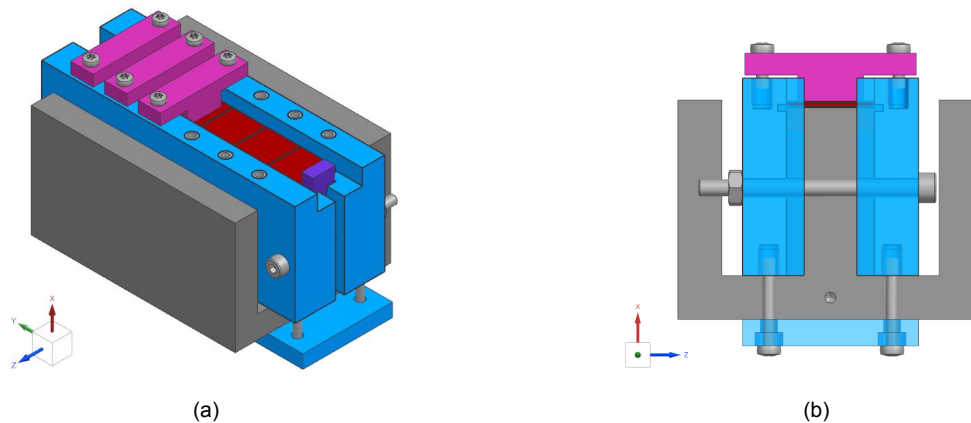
Stator core with 3D-printed tooling for magnet installation.
